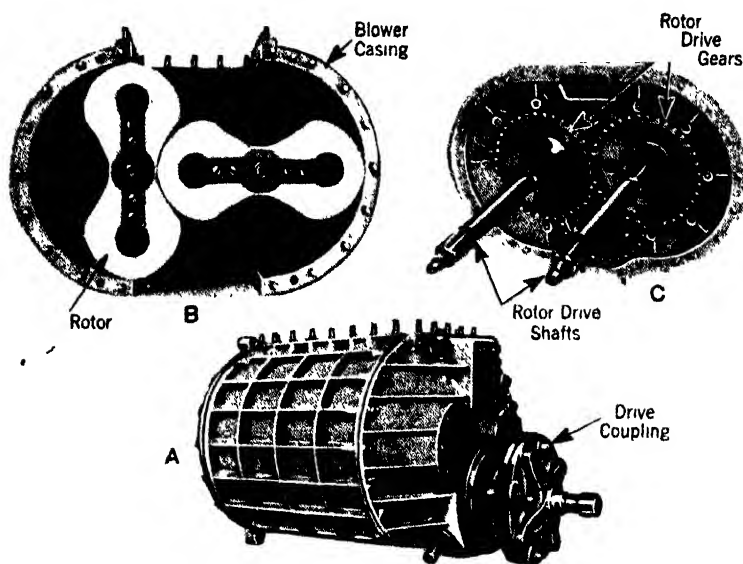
View at A Shows Root Supercharging Blower Assembly. B—End Plate Removed to Show Rotors. C—End Plate and Rotor Drive Gears and Shafts.
